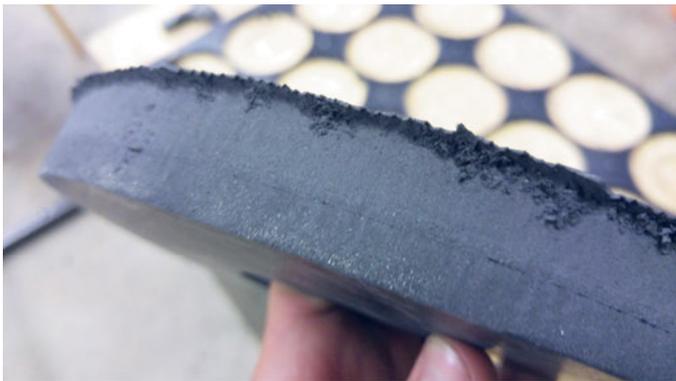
The surface of a rubber disc which has been machined in the constructed prototype version of the rubber disc machining robot cell.
